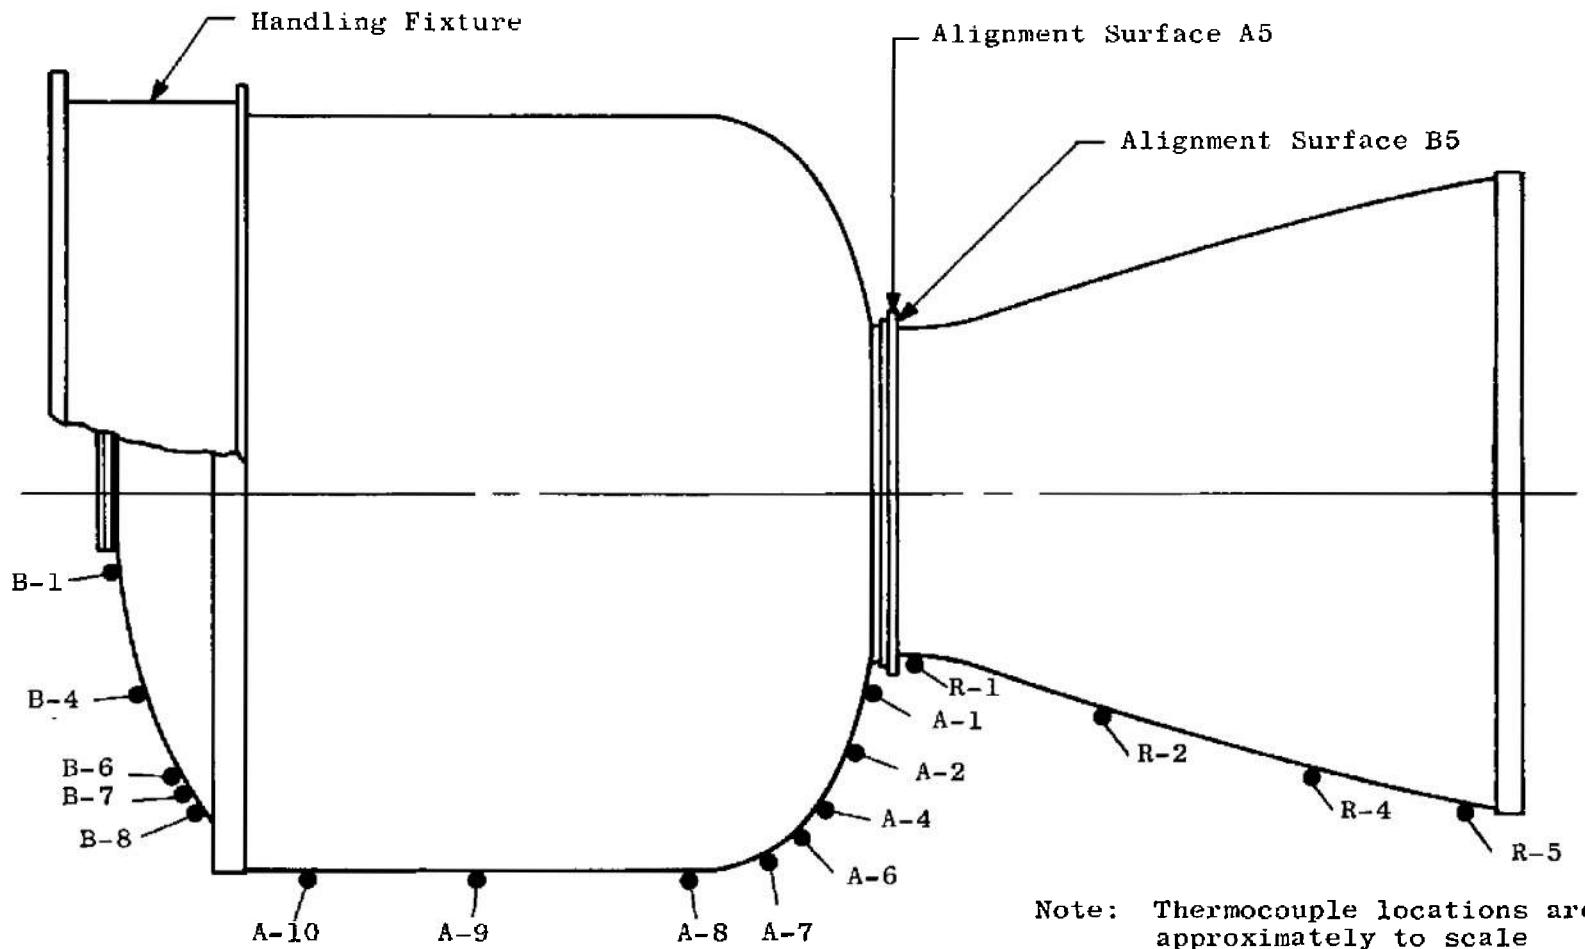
Thermocouple and Alignment Surface Locations on the Motor Assembly
